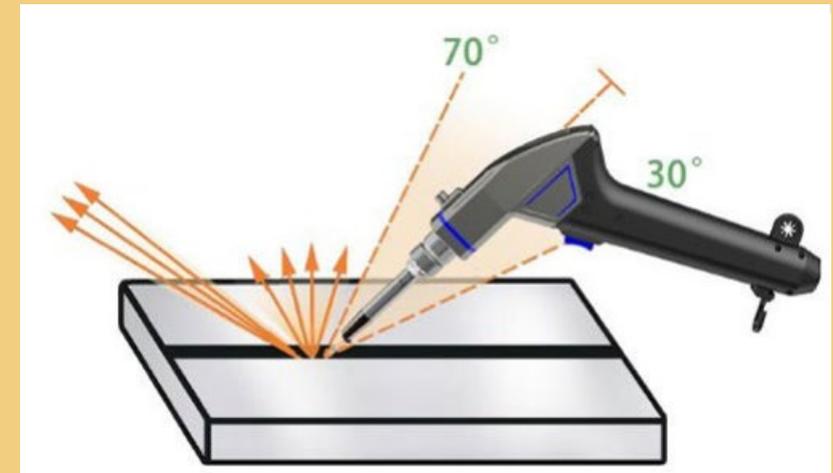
LASER WELDS AT JOINTS
